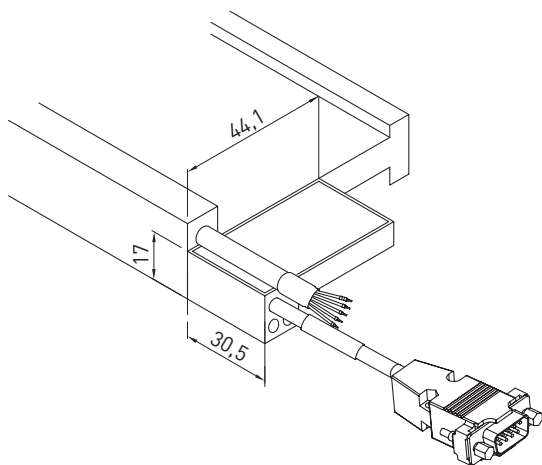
Example mounting of a Hall sensor to an LMC linear motor
